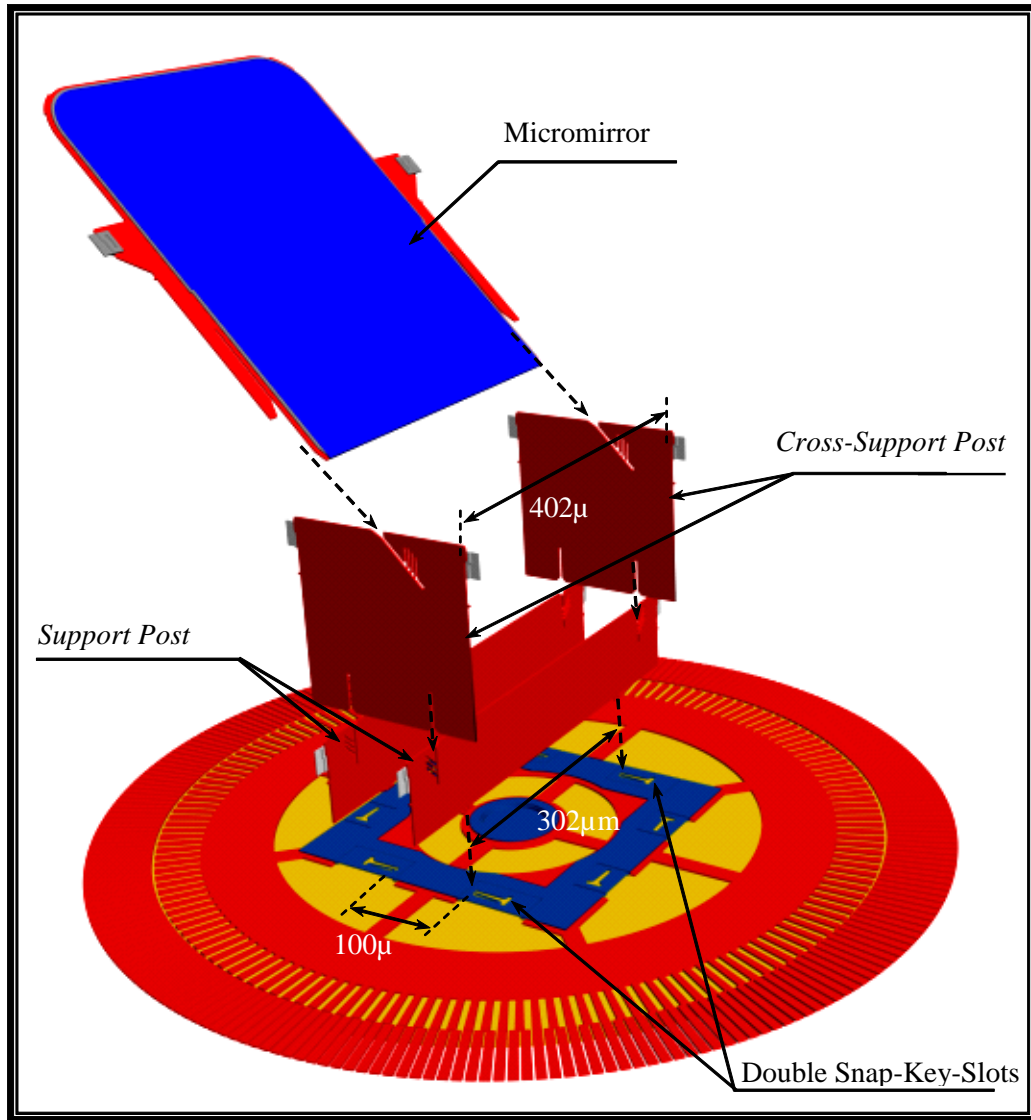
Schematic drawing of the microparts used in the second assembly technique.
